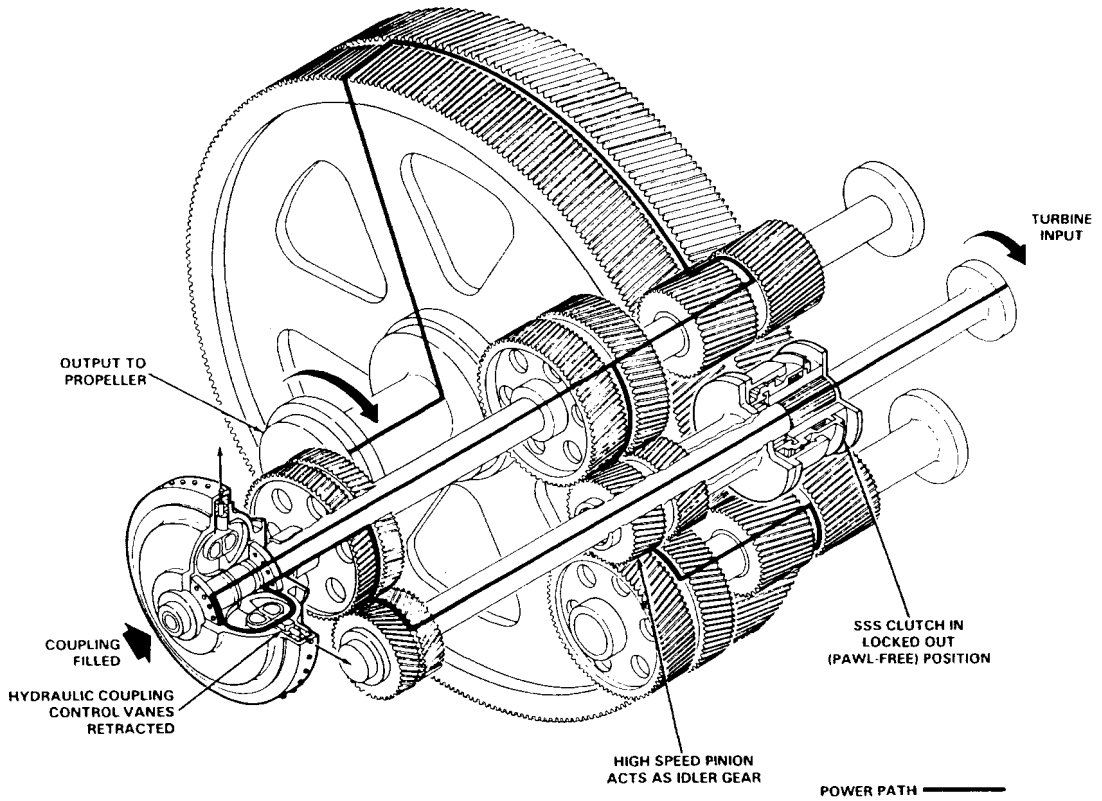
REVERSE REDUCTION GEAR WITH FRANCO-TOSI COUPLING: MANOEUVRING AHEAD OPERATION
